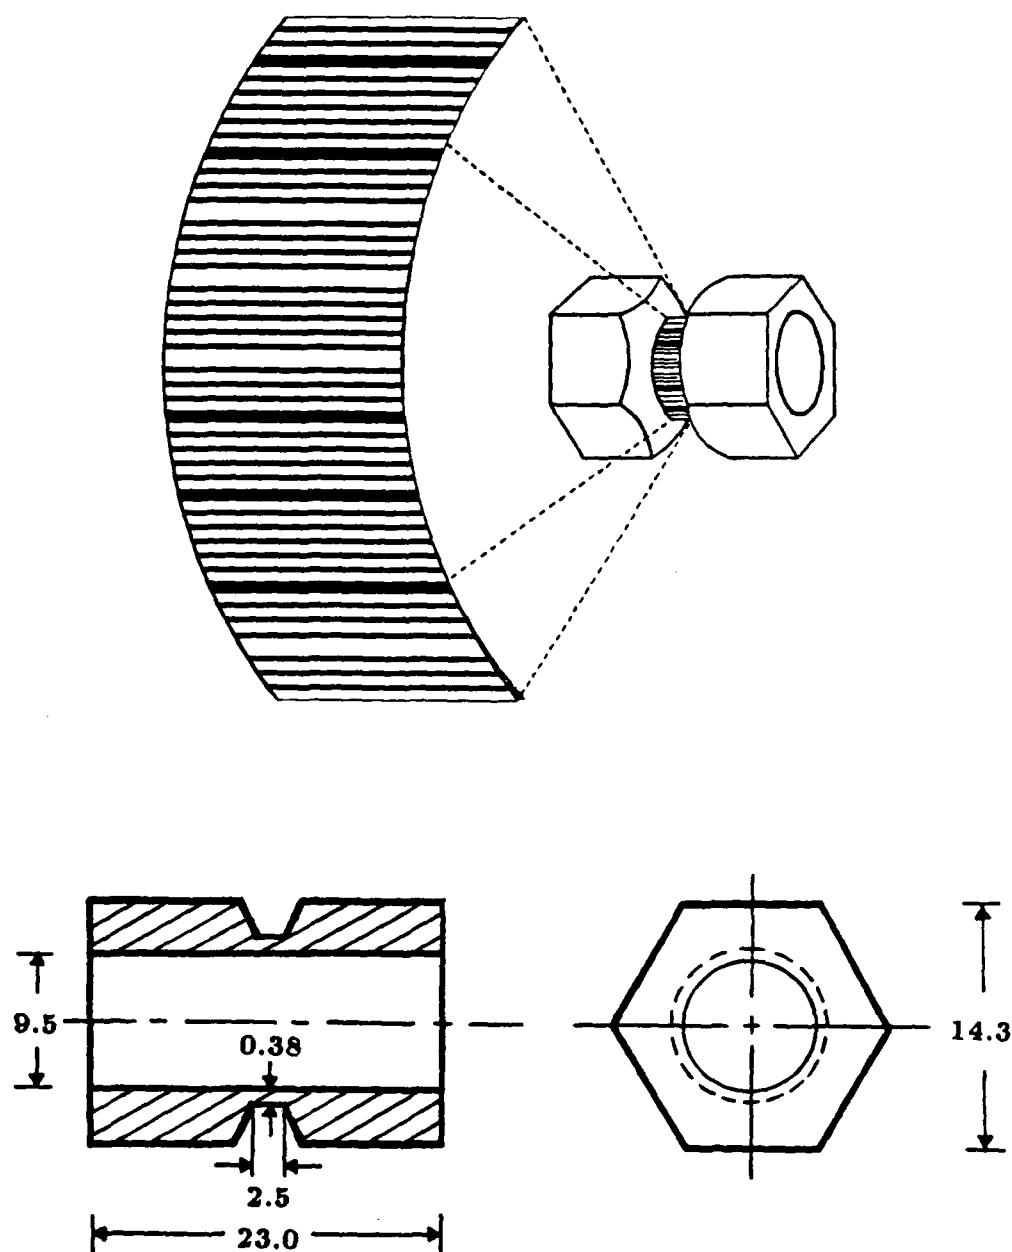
Details of the thin-walled tubular specimen with a blow-up of the fine grid deposited photographically on the outside surface of the specimen. The dimensions are in millimeters.
